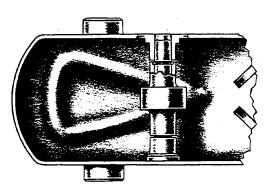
Sectional View of Treadle Assembly for E-1 Brake Valve
